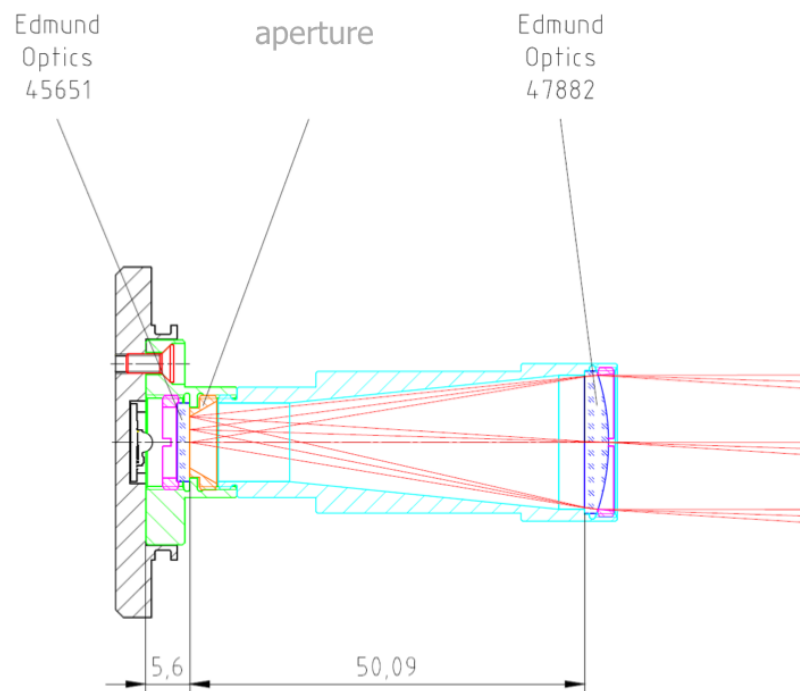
Engineering drawing of the Prototype 2.(70)
